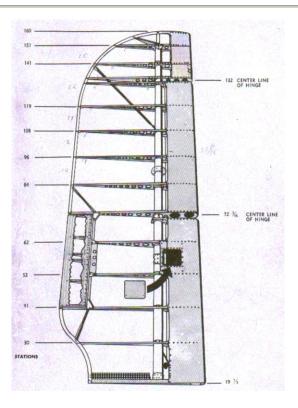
DC-3 ELEVATOR SUBSTRUCTURE [2]
